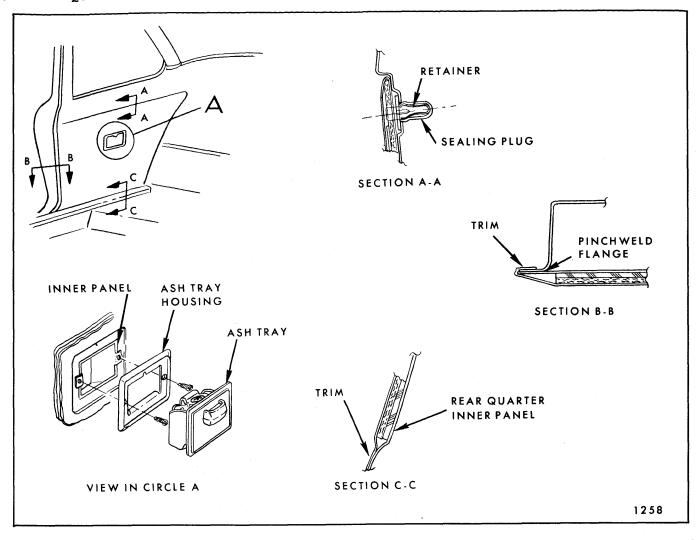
Rear Quarter Trim Assembly - "Z" Body Styles
